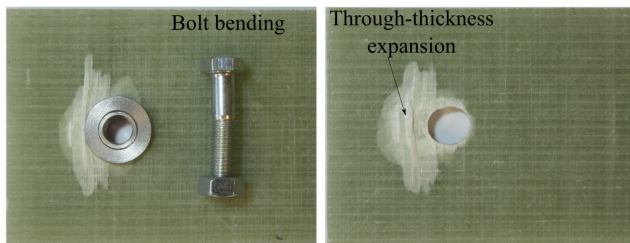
Failure mode of the bolted joints with inserts (BI tests)
